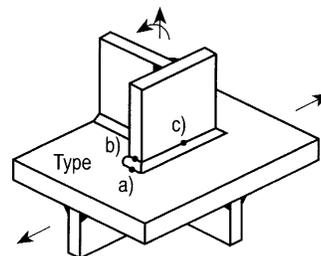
Types of hot-spot in welded structures: (a) Weld at end of longitudinal attachment (weld toe or end on loaded plate surface); (b) Weld on or around a plate edge (weld toe on plate edge); (c) Weld transverse to loading (weld toe on loaded plate surface).
